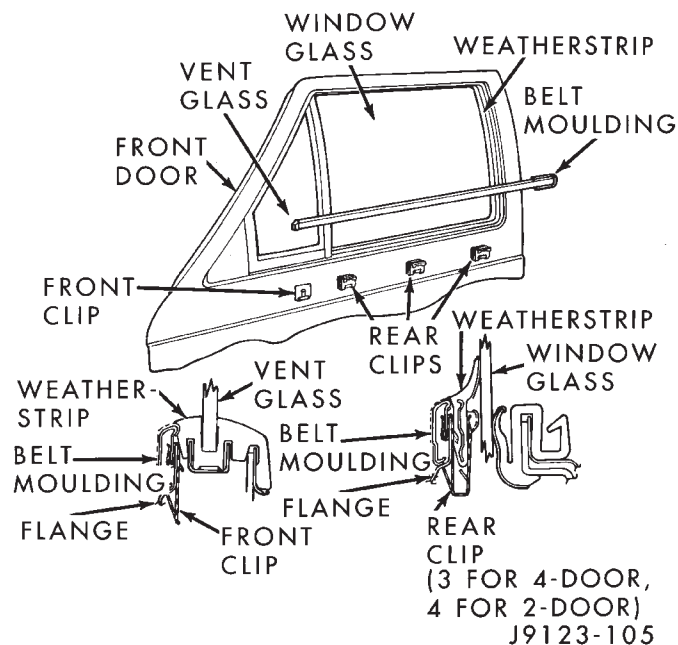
Front Door Beltline Molding and Weatherstrip Seals
